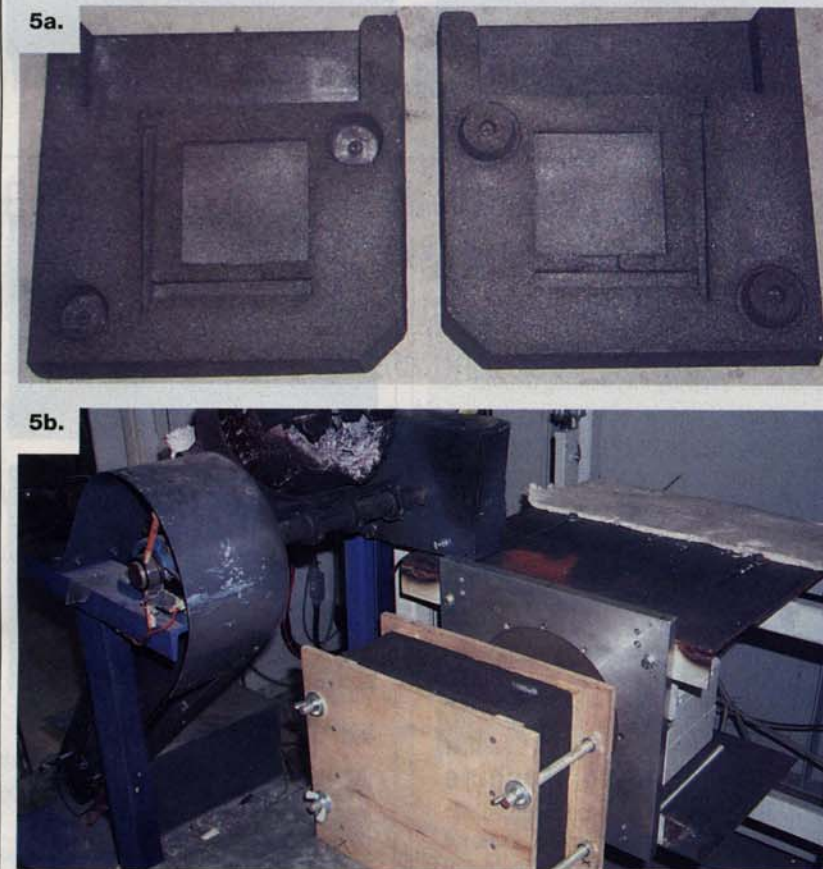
Conventional sand casting; a) furan resin bonded mold halves; and b) pouring arrangement in the lead vault.
